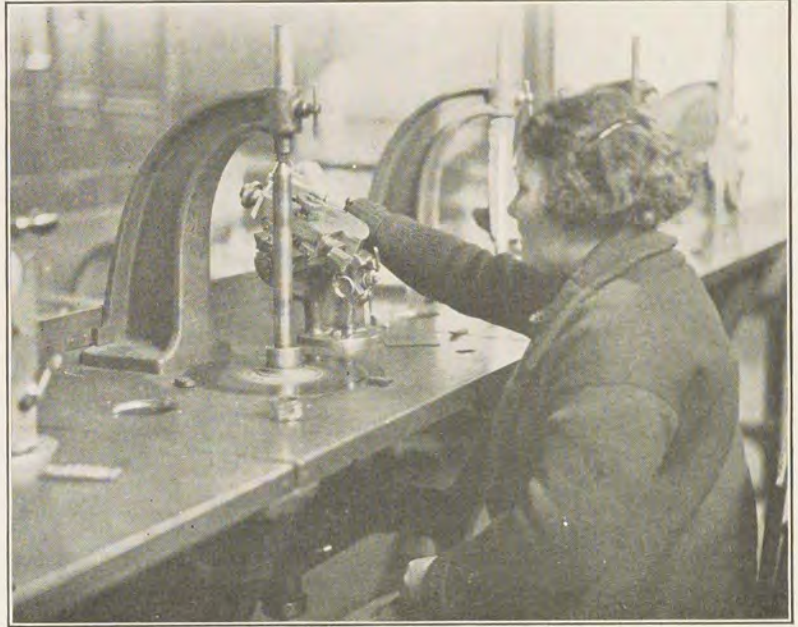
Operating a Stern-Coleman diamond polishing machine.
